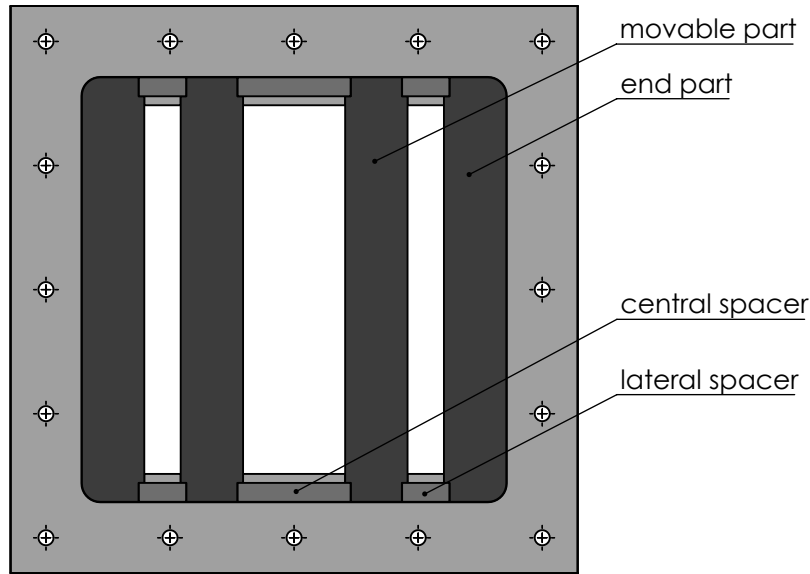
Modular backing plate designed for the tunnel and semi tunnel tests
